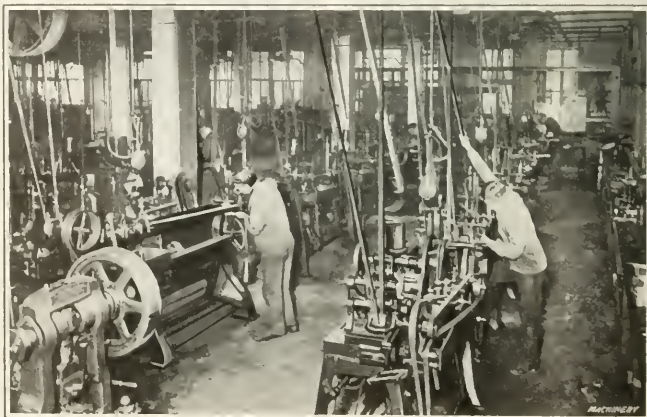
General View in Shop of Keller Mechanical Engraving Co.
